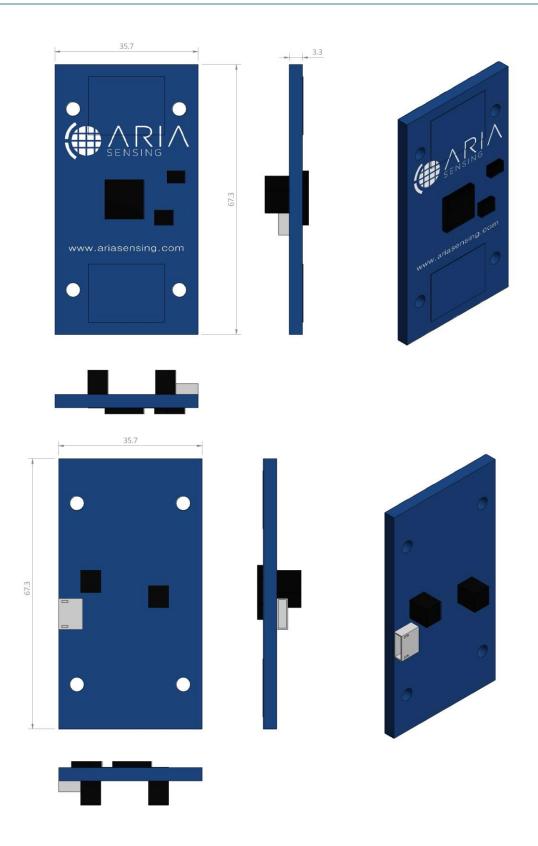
LT102 drawings. Note: all mounting holes are 3.5mm diameter
